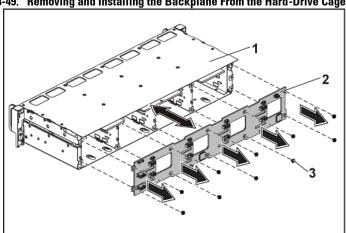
Removing and Installing the Backplane From the Hard-Drive Cage
